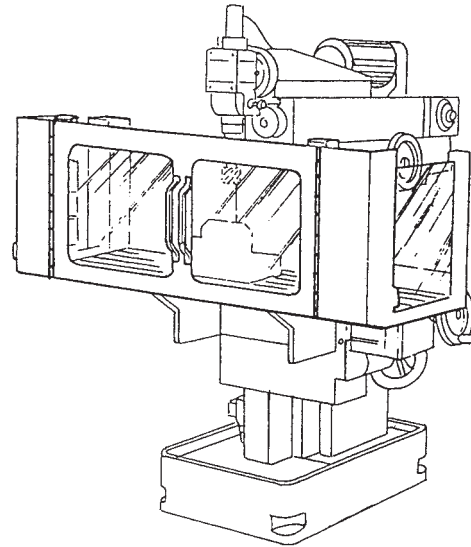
Examples of adjustable guards for manually controlled milling machines
